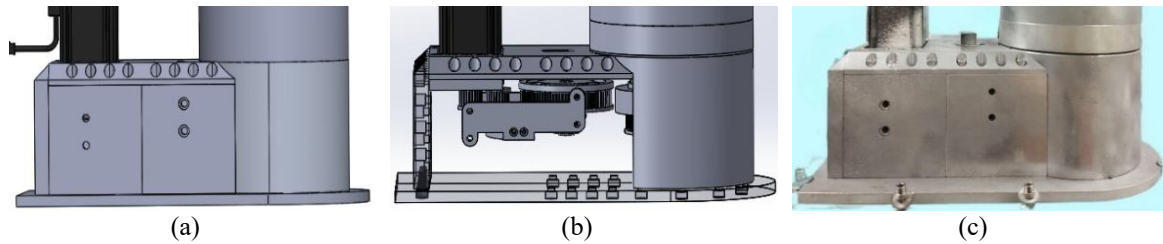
Mechanical design of Joint 1, (a) CAD design of the base, (b) transmission system, and (c) the prototype of the base
